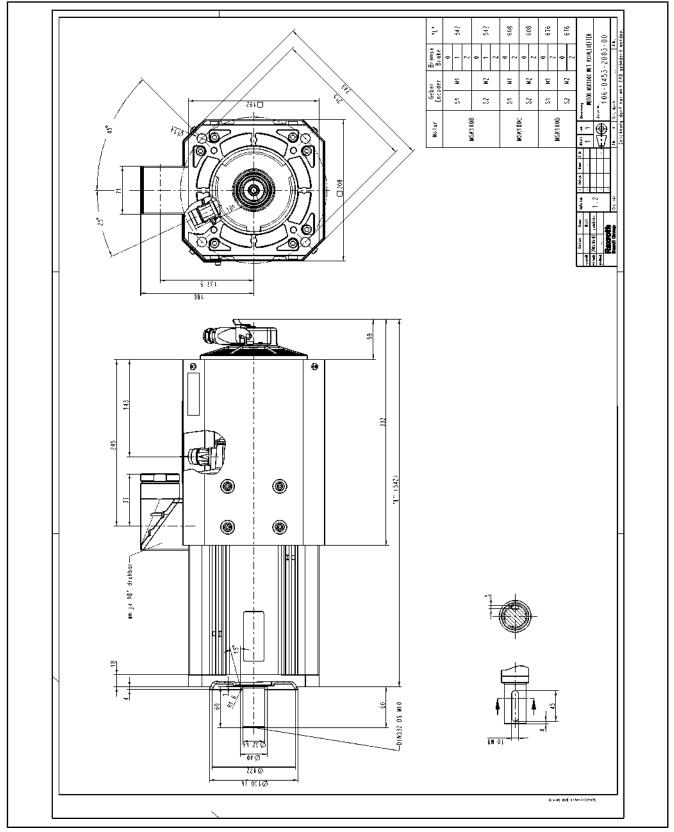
Dimension sheet MSK100 with axial fan unit
